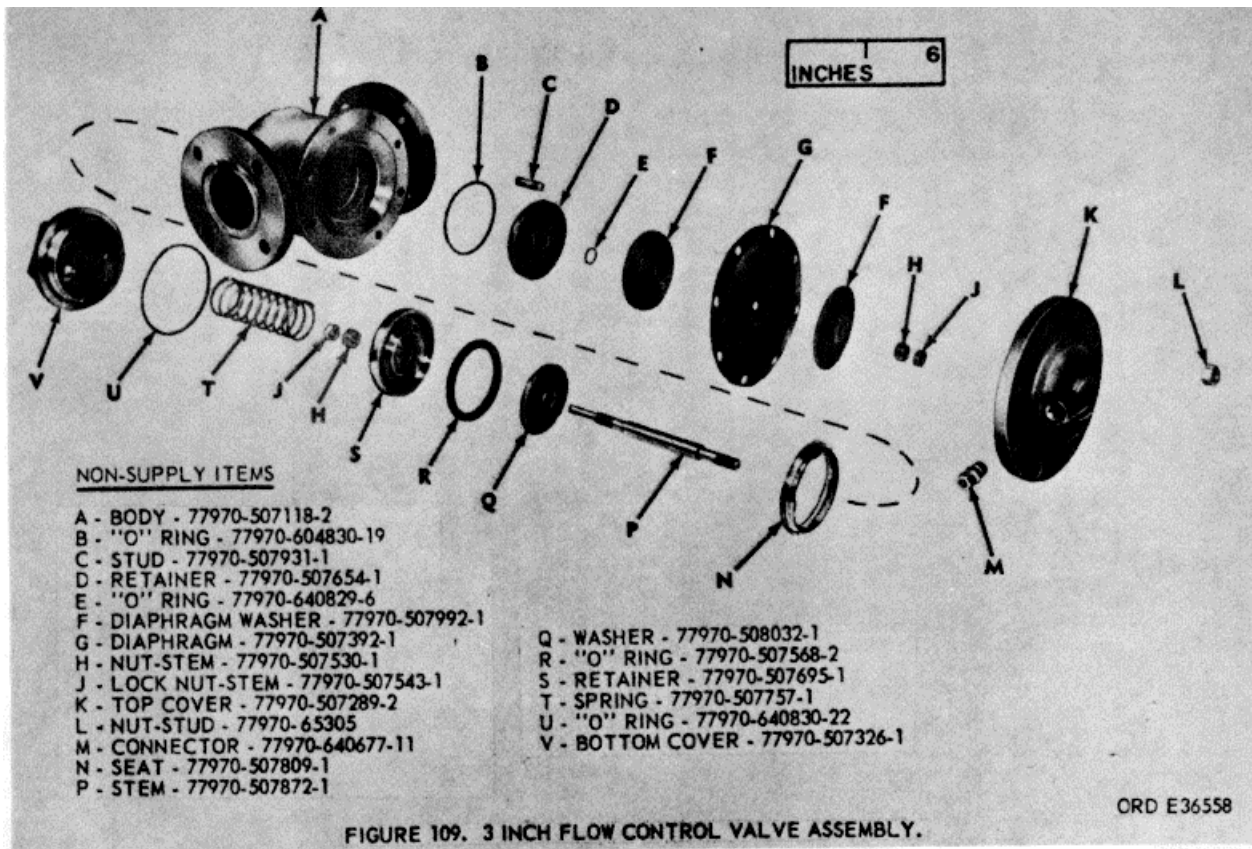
3 INCH FLOW CONTROL VALVE ASSEMBLY.
